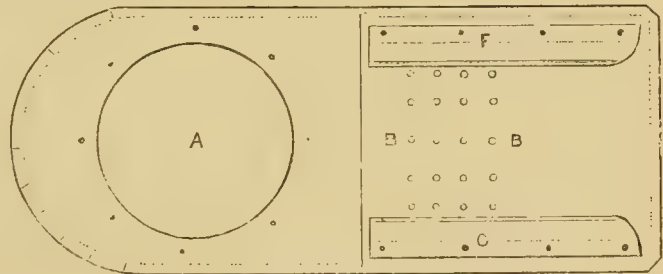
PIECE FOR FRONT OF LANTERN (D PIECE).
